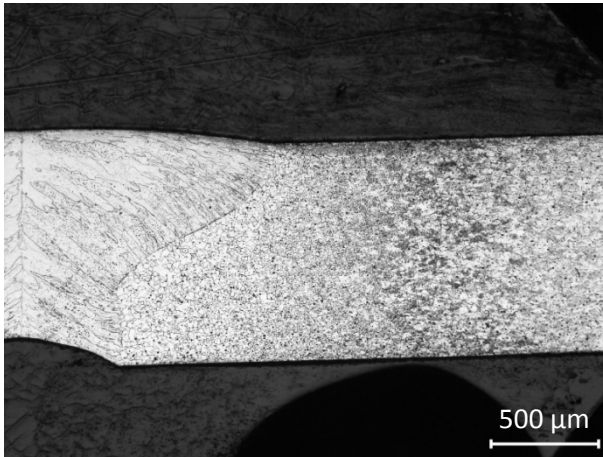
Macrograph of F-F 1.0 mm thick similar joint showing the welded zones
